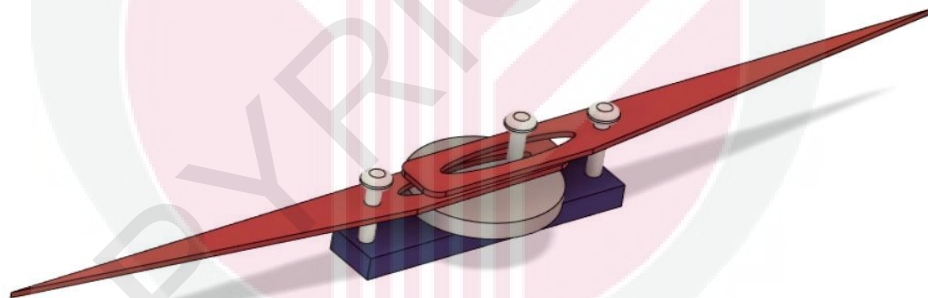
Single Crank-Sliding Dual Lever (SC-SDL) Model with Single Button Vibration Motor as Driving Source
